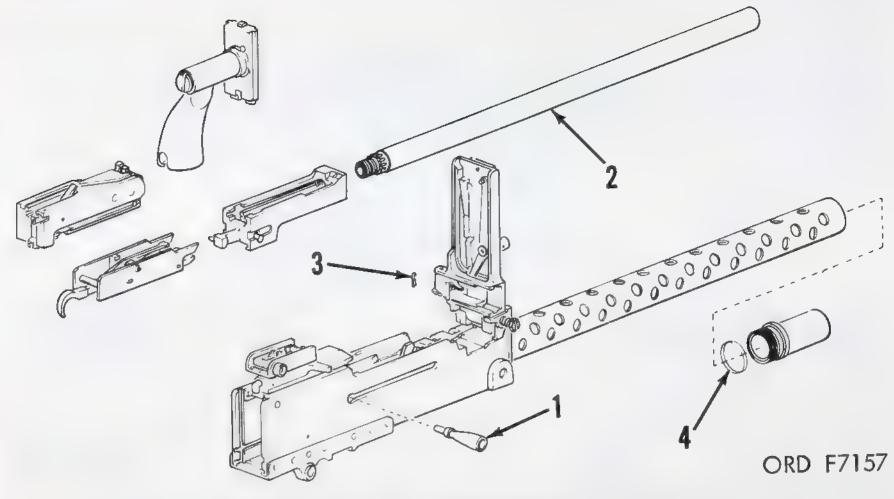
Major groups, assemblies, and component parts for machine gun M1919A4.
